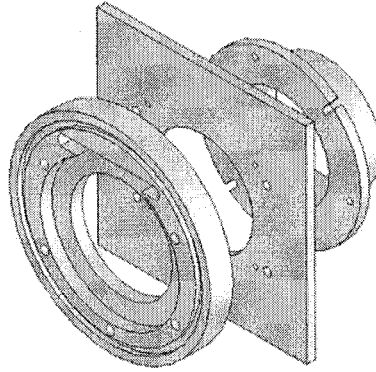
Check valve subsystem. The swing check valve is on the left and the flange is on the right. In between is the steel plate used to mount the two together. The airbag sleeve fits over the back of the flange.
